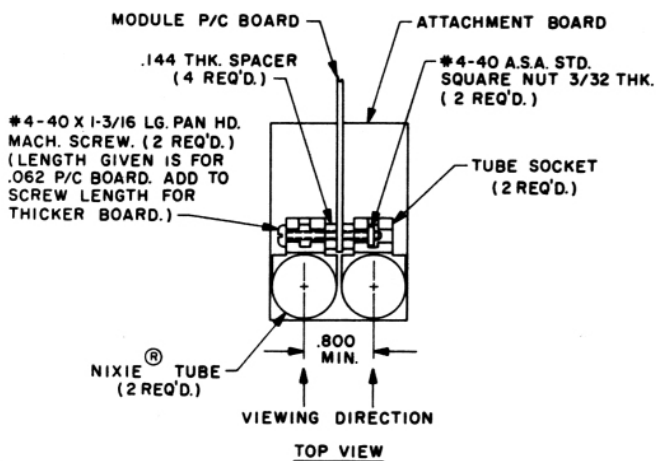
DRIVER MODULE BOARD DUAL SOCKET MOUNTING
